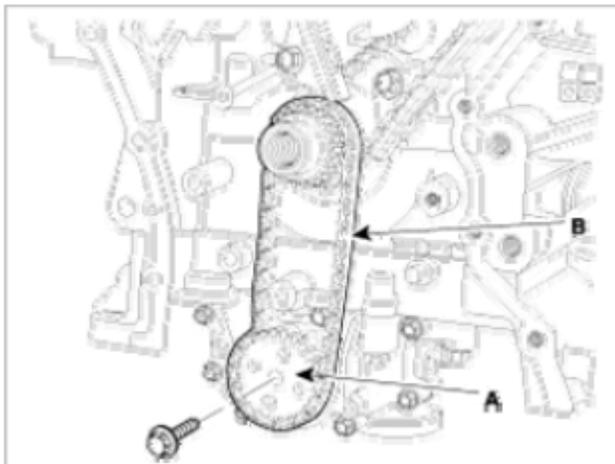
Locating Oil Pump Chain And Oil Pump Sprocket
